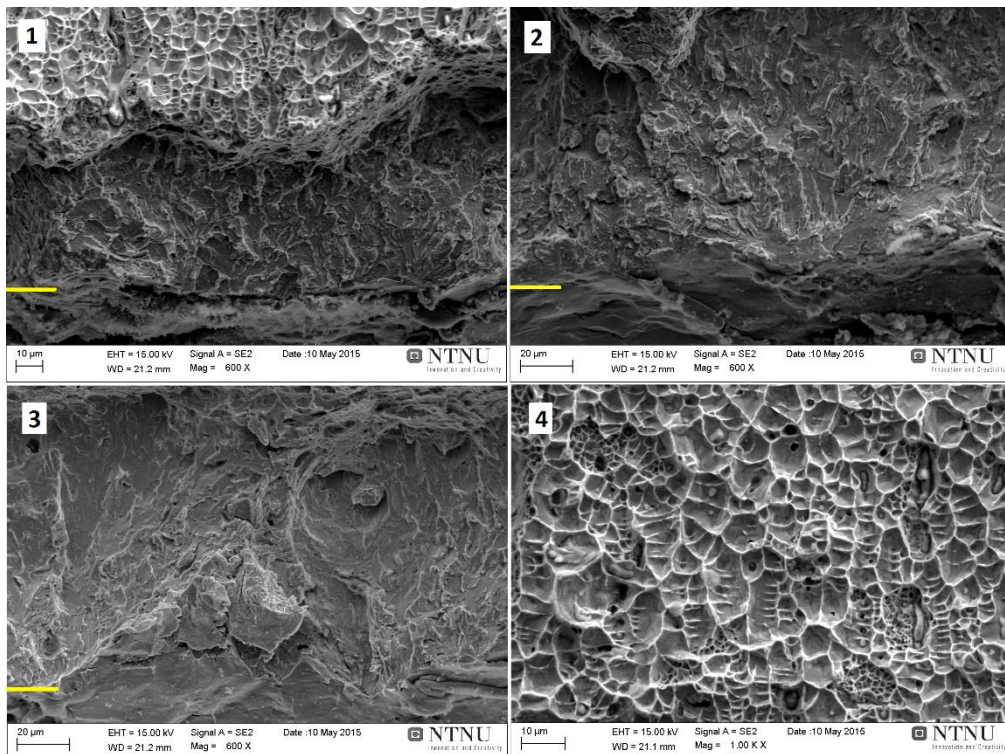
Sample A, test 5, BM section of specimen. The fracture surface is above the yellow line. The areas 1-4 are indicated in Figure 80 above.
